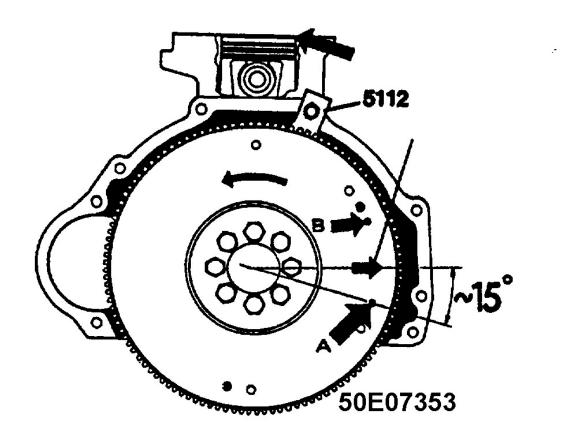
Using Gear Selector (5112) To Lock Flywheel Courtesy of VOLVO CARS OF NORTH AMERICA
